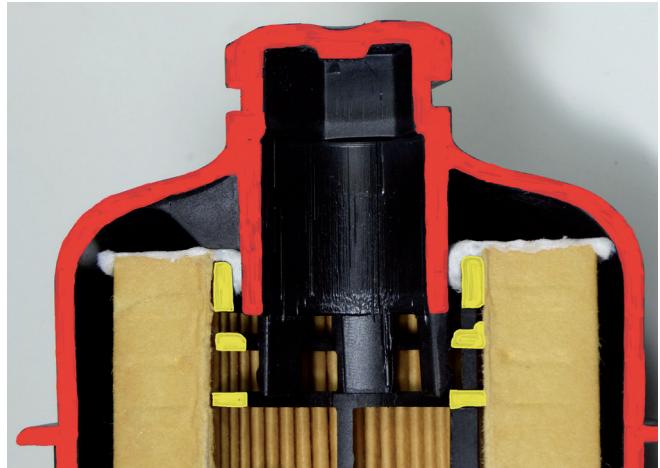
During assembly, the fleece (white) is pressed in between the inner tube (yellow) and the standpipe (red), thus ensuring a complete seal.
